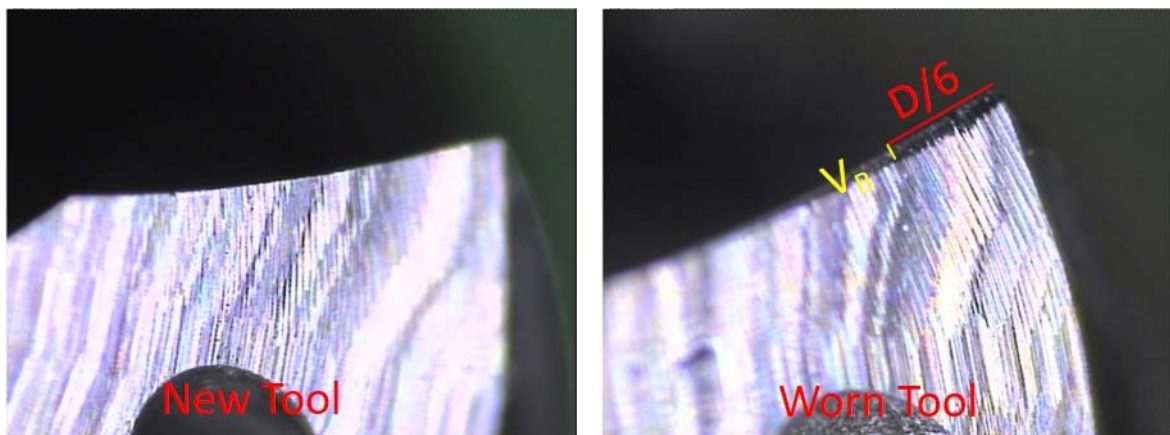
Tool wear evaluation for a TC tool: a traditional tool, T, operating with process conditions C (6000 rpm – 0.15 mm/rev).
